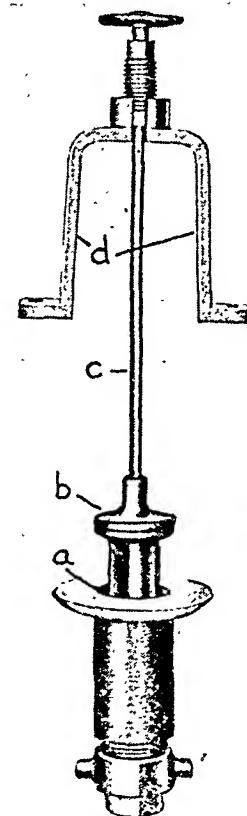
FIG. II—Showing round vat holder equipped with bottom outlet flush-type valve--
